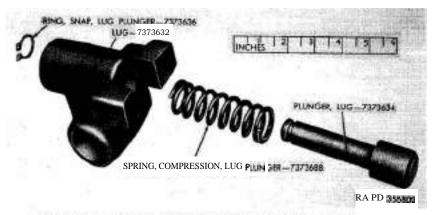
Reverse shifter shaft lug assembly—exploded view.
